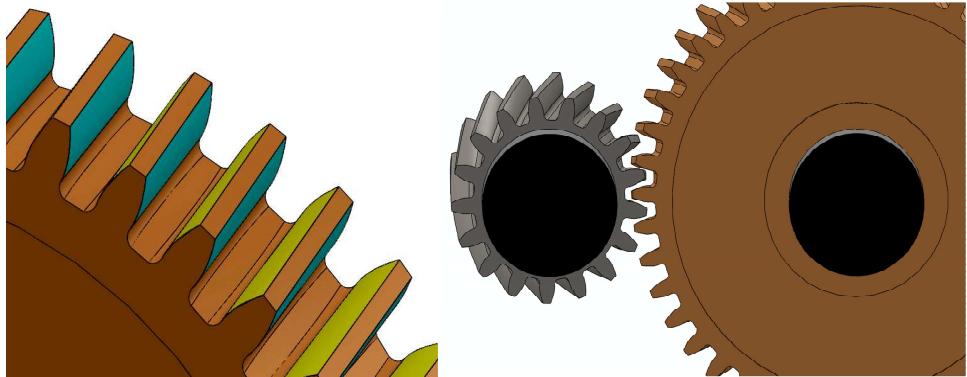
Xylan 1052 film applied on to the teeth flanks (left), gearing between pinion and driven wheel (right).
